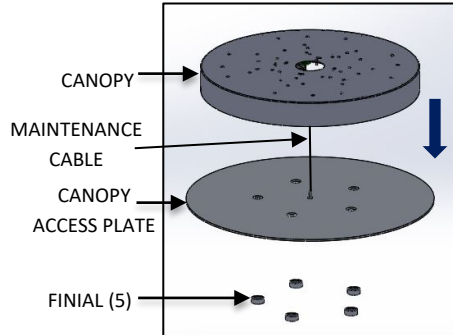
CANOPY ACCESS PLATE DIS-ASSEMBLY
